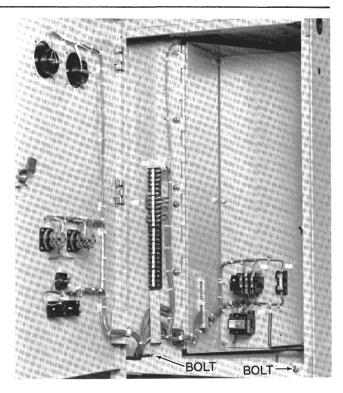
Remove the bolts shown and slide the horizontal barrier out of the enclosure.
